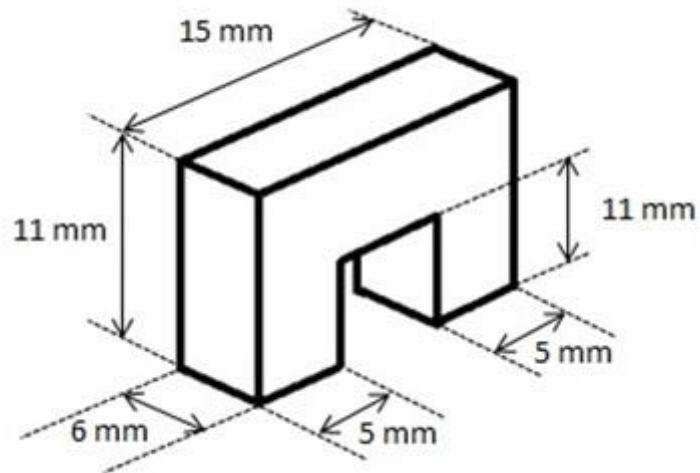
Schematic diagram of the U-shaped sensor core with dimensions
